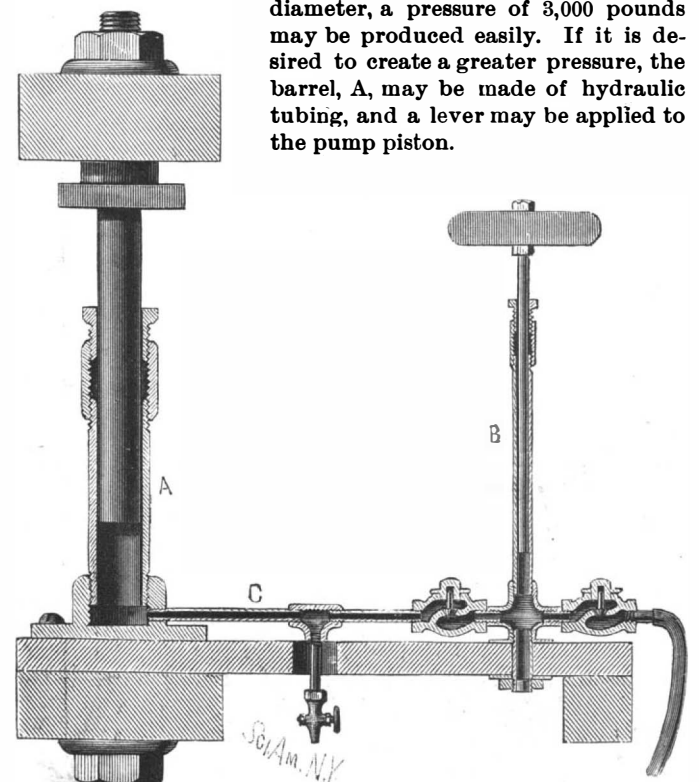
SECTIONAL VIEW OF SIMPLE HYDRAULIC PRESS.
